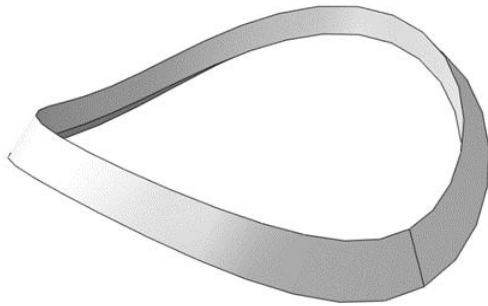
Three-dimensional diagram of fillet weld
